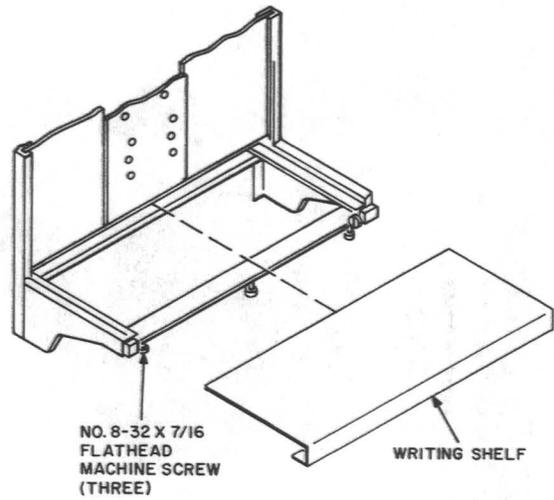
Assembly of Writing Shelf on KS-19267 Shelf
